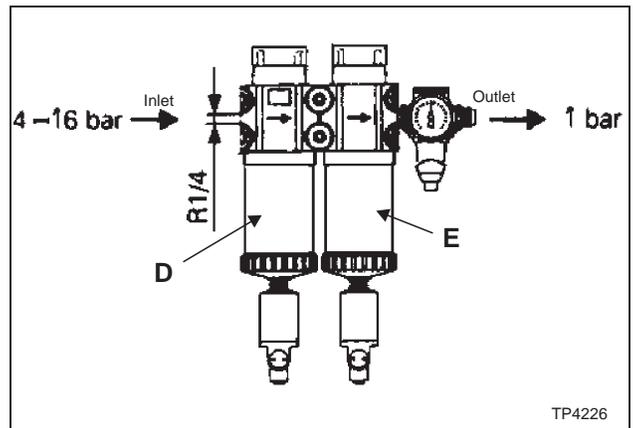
Optical Scale Filter/Regulator Air Module
